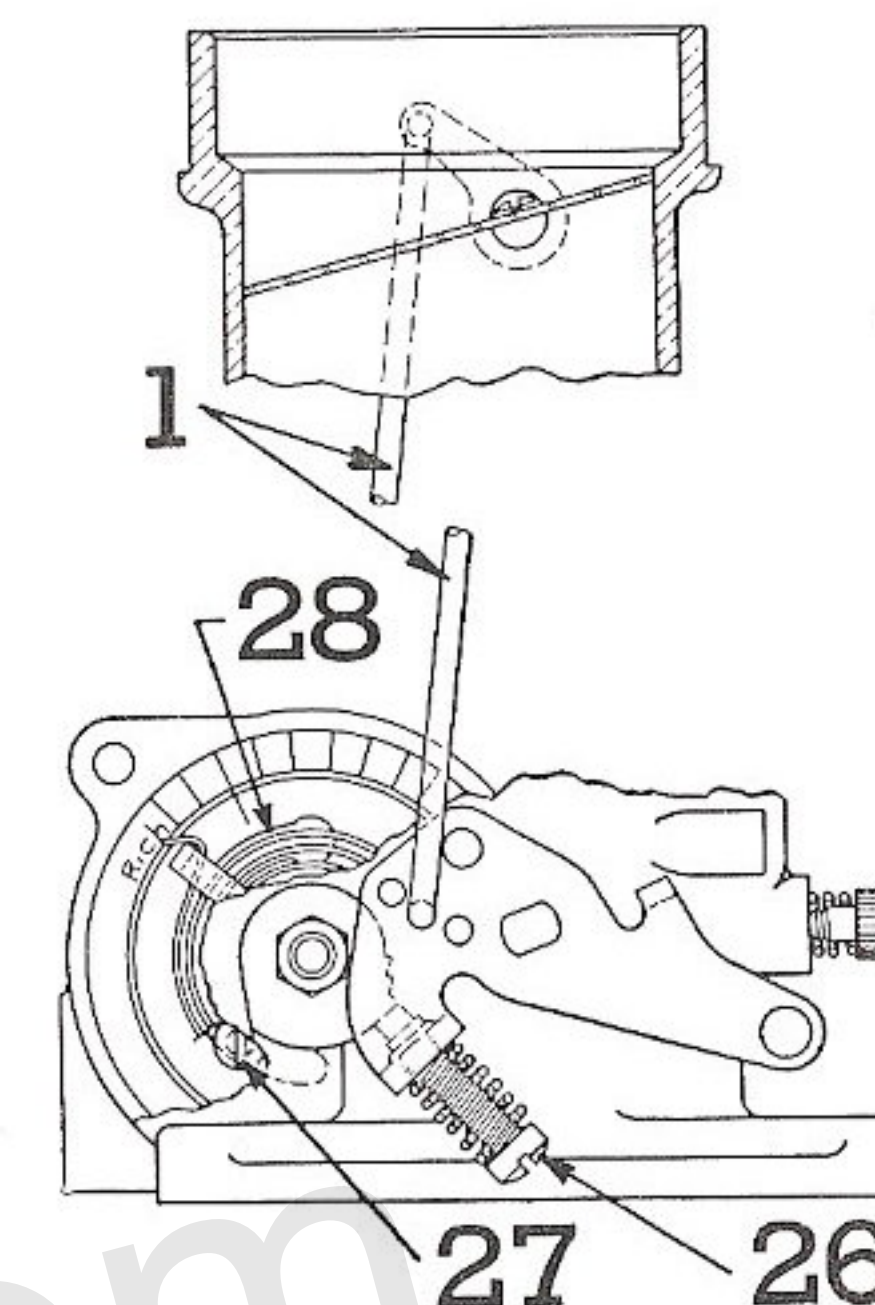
Phantom View of Automatic Choke Thermostat, Valve and Linkage
